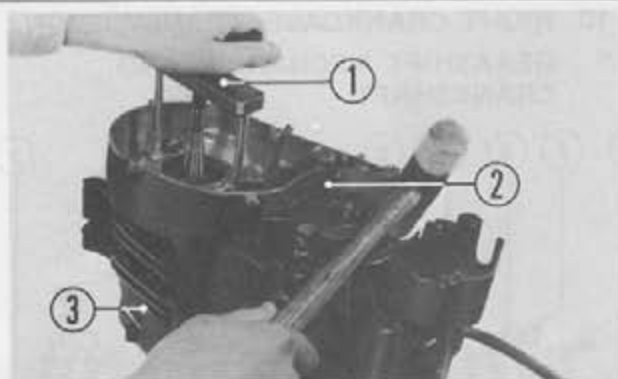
① Crankcase puller ③ Right crankcase
